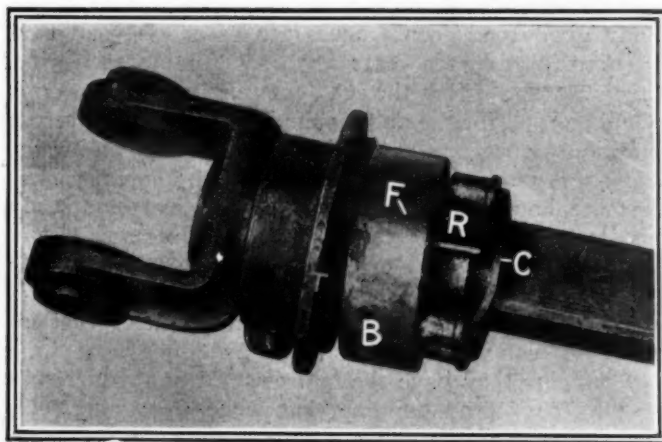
A universal joint which has been broken by being knocked too far out of alignment
